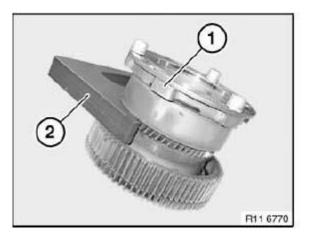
Identifying VANOS Gear And Special Tool Courtesy of BMW OF NORTH AMERICA, INC.
